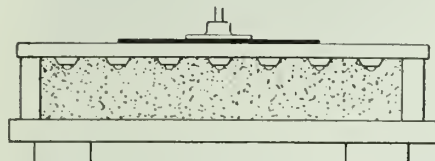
DISC DRAWN DOWN FLAT BY VACUUM
